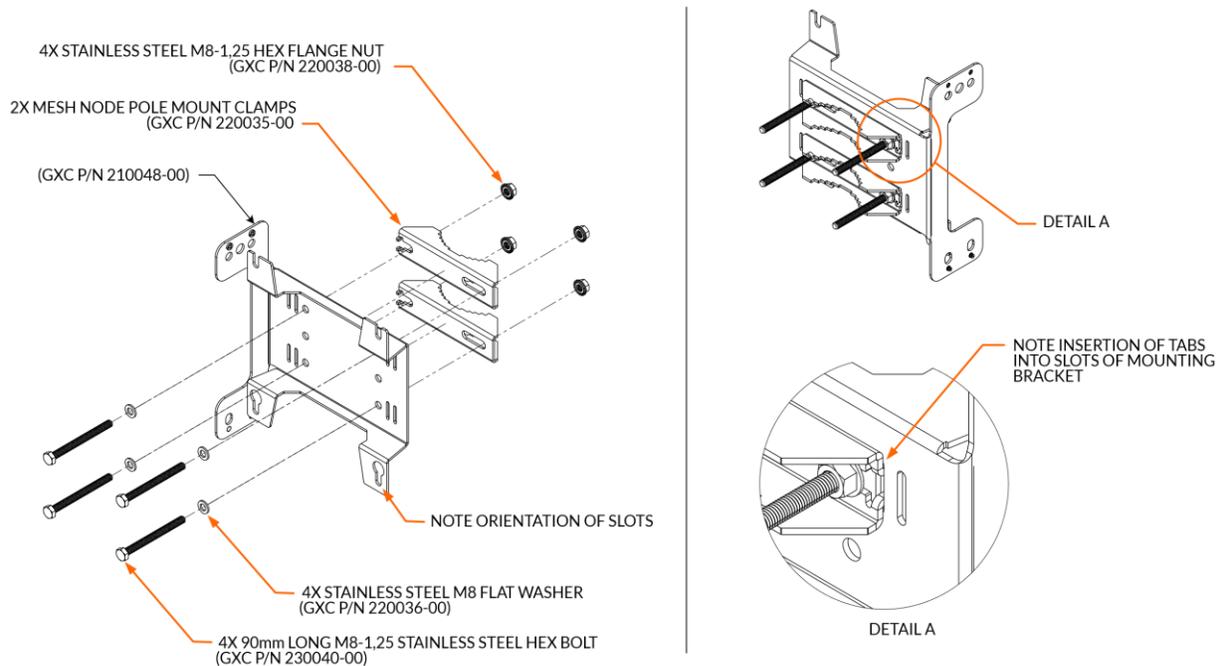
Features and Dimensions of Mounting Bracket Assembly
